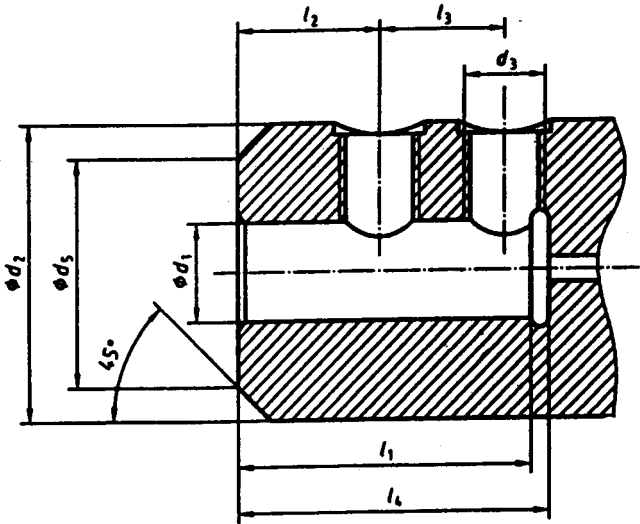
CHUCKS FOR TOOL SHANKS WITH DOUBLE FLAT
